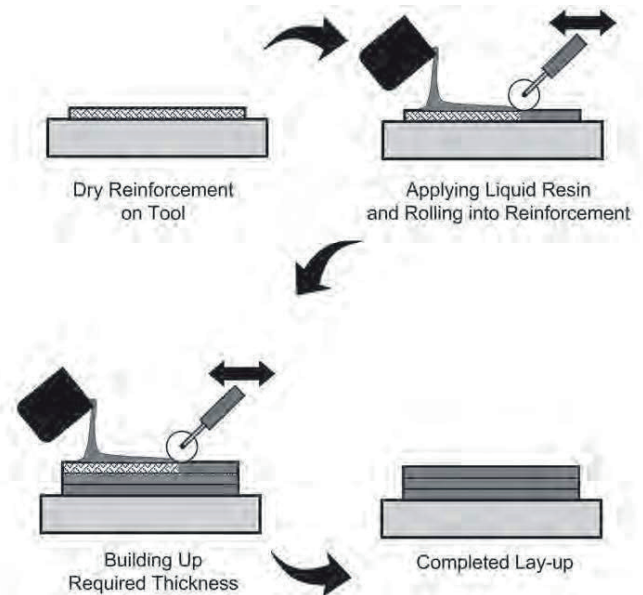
Hand/auto lay-up working principle (Campbell, 2010).
